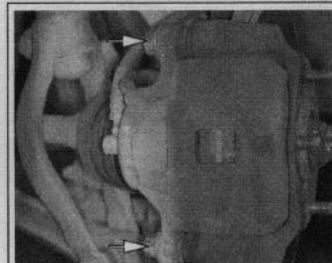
The brake caliper is mounted to the caliper support with two bolts
